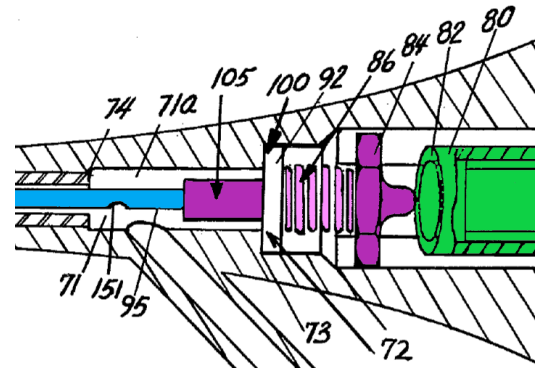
Schematic representation of the cam and spring biased follower mechanism. Essential components: 80 = cam-tube, 82 = cam face, 84 = follower, 86 = compression spring, 92 = retaining ring, 95 = inner cutting tube, 105 = connection of follower and cutter. Adapted from: [76]
